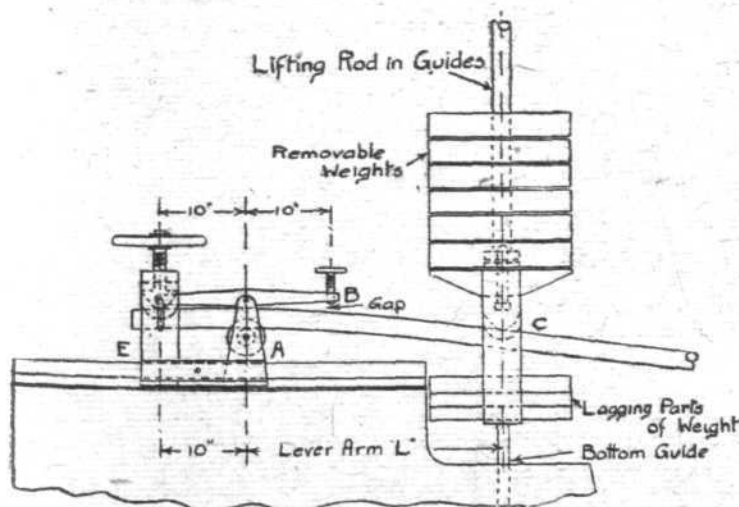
DIAGRAM OF AXLE-TESTING APPARATUS
